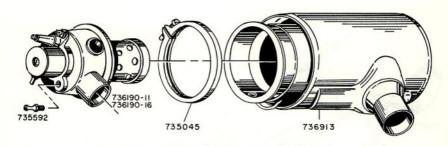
HEAT EXCHANGER & BURNER ASSEMBLY 736942 (6V) & 736942 (12V) USED ON MODELS 8335 and 8335-12
